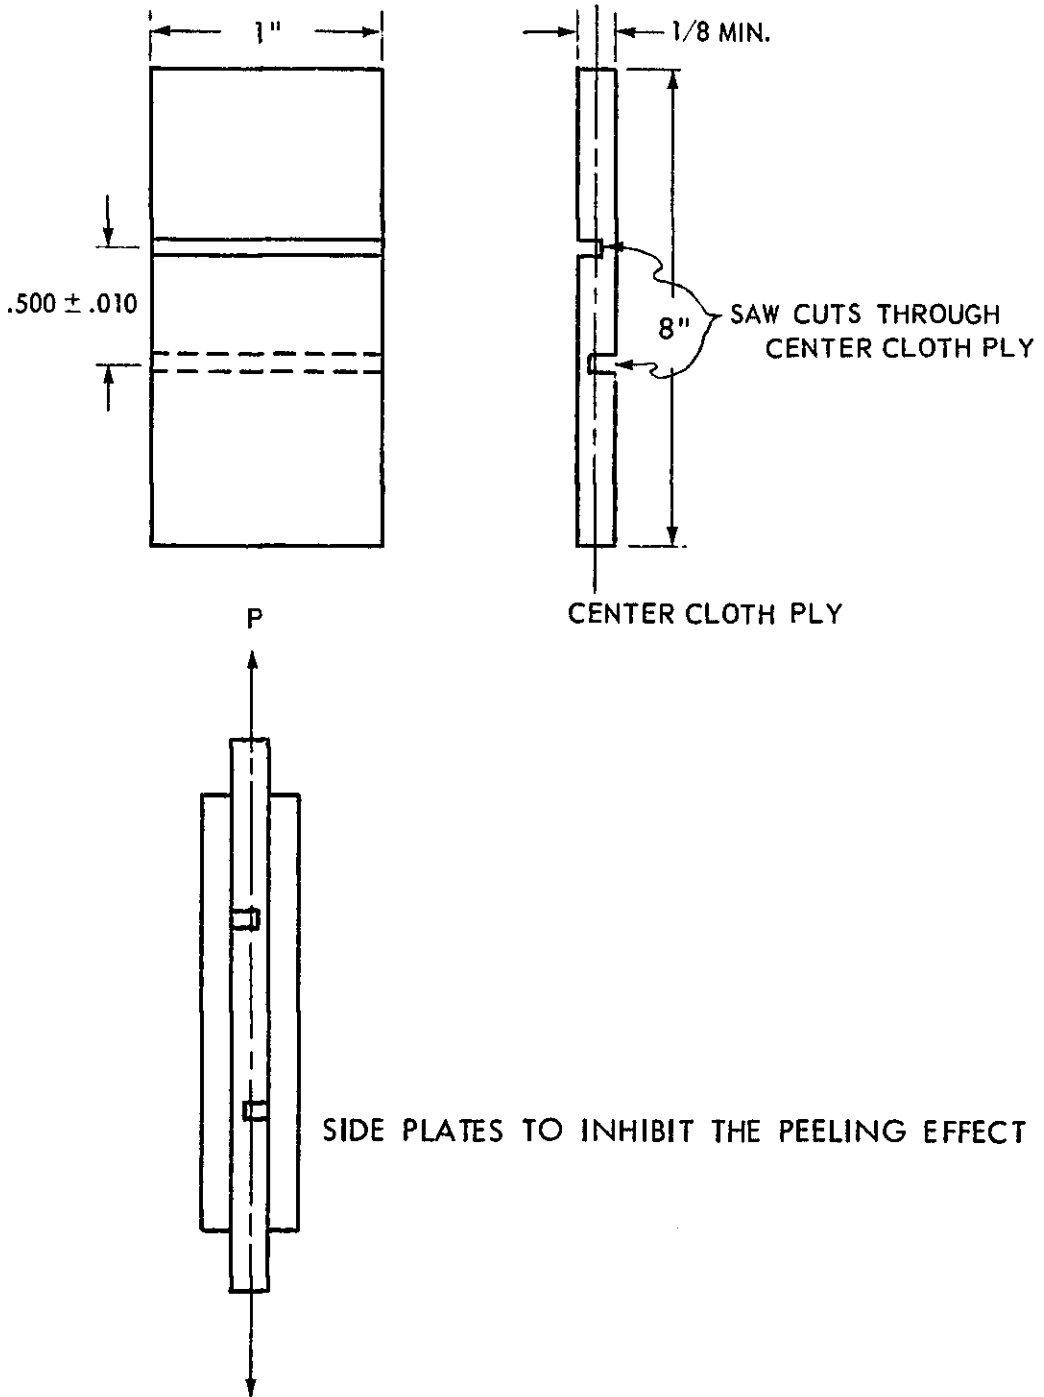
Typical test specimen for interlaminar shear testing.
